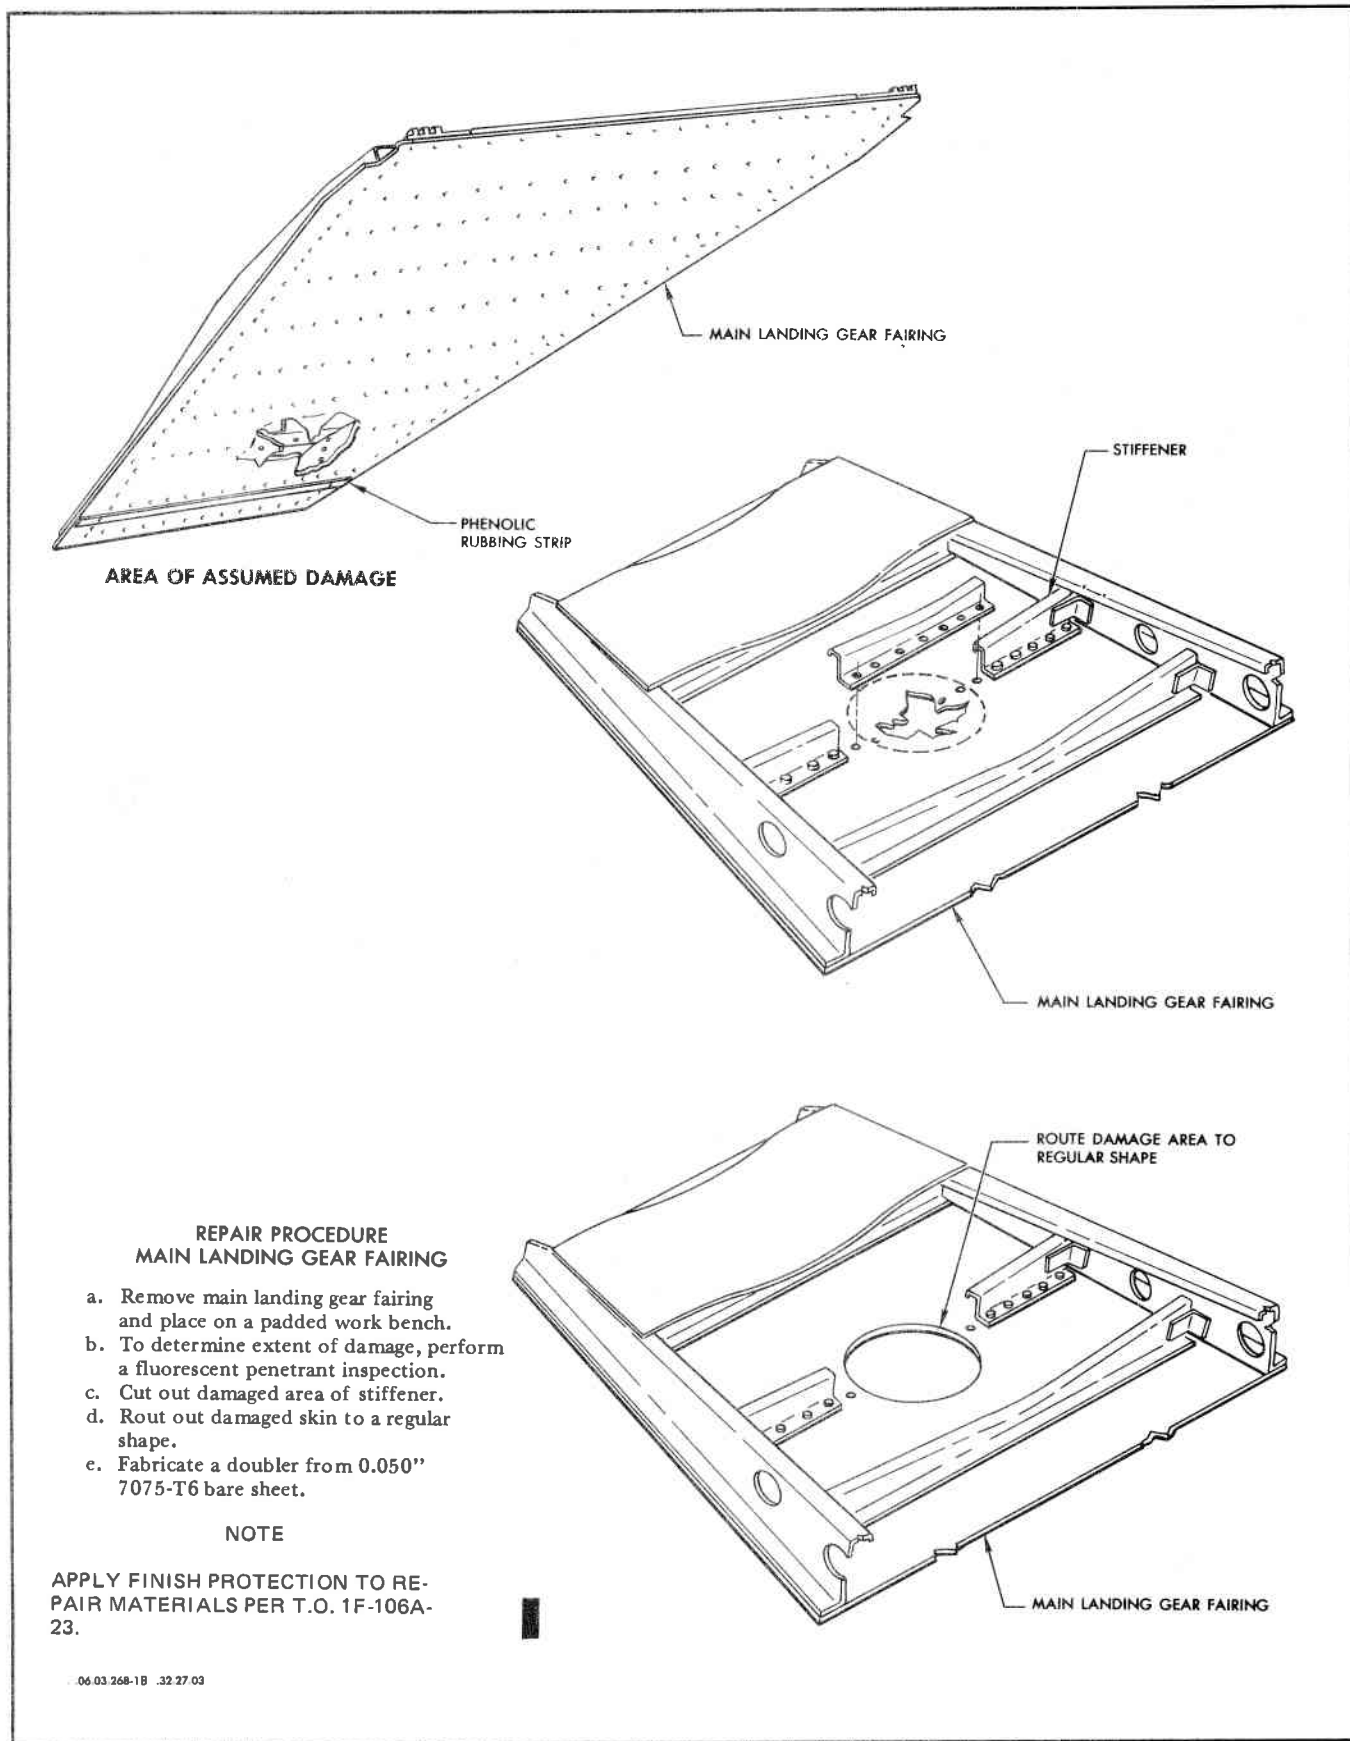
Main Landing Gear Door Attachment Repair (Sheet 2 of 2)
